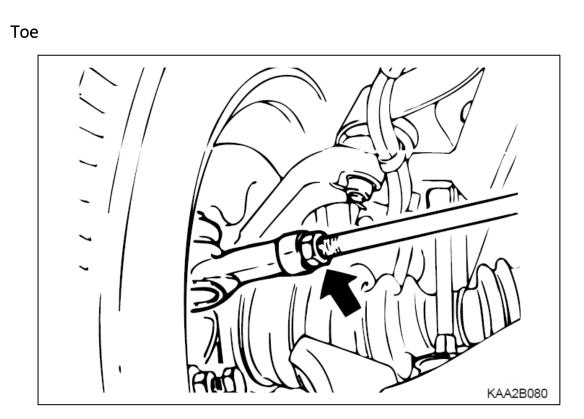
Loosen the tie rod end lock nuts to adjust toe angle
